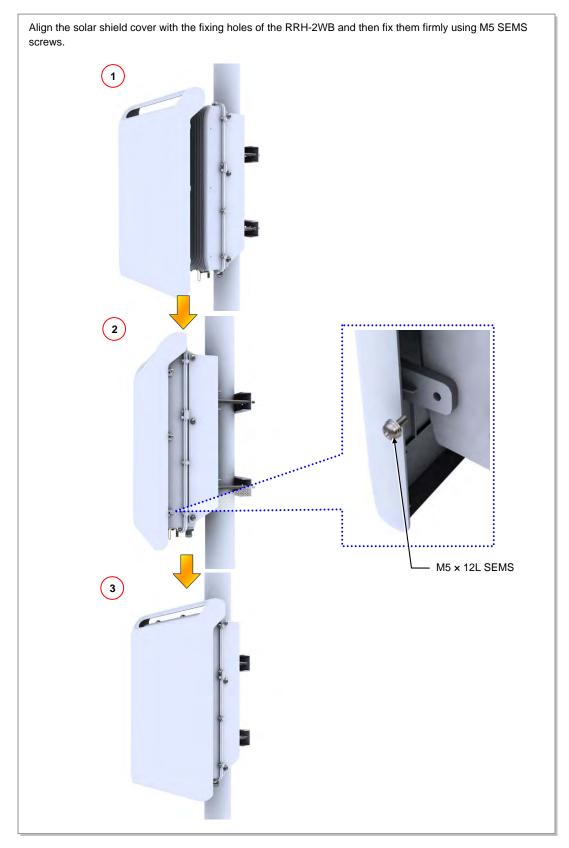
Fixing 1 Sector Pole Type RRH-2WB (3)
